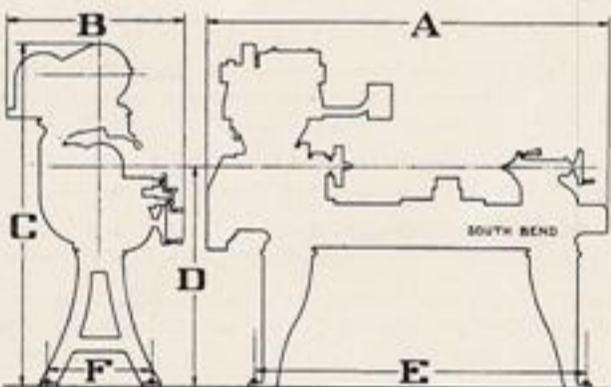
Floor Leg Lathe, Silent Motor Drive
